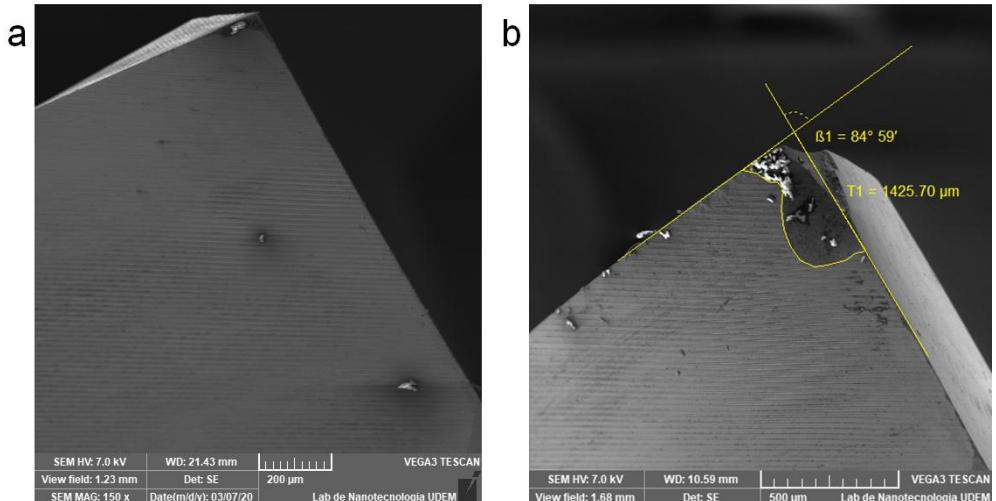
Image of the edge of an endmill without texturing (a) before and (b) after the machining experiments.
